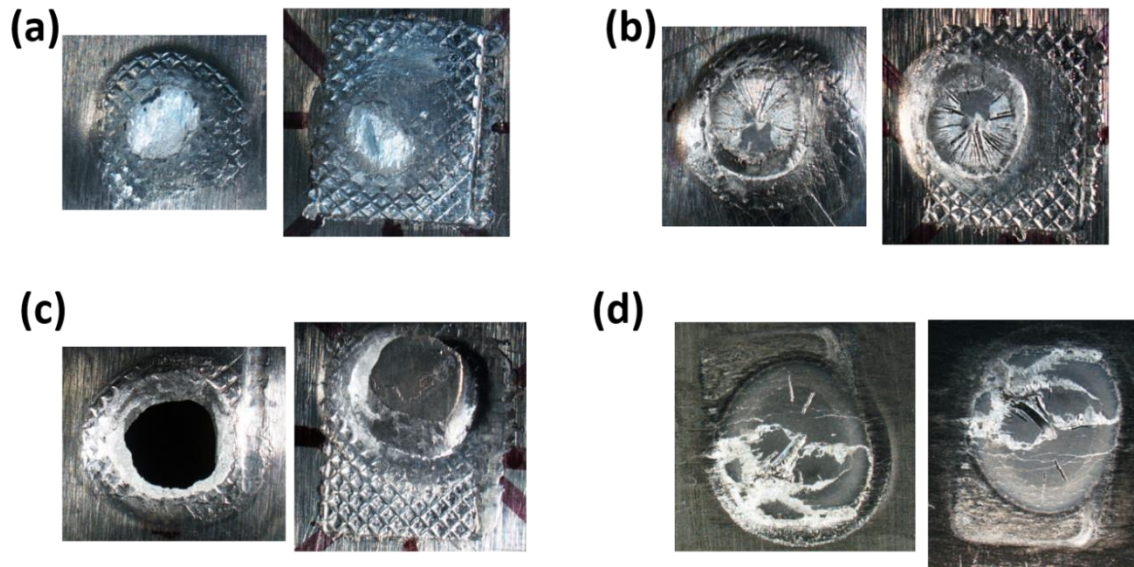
Representative fracture surface for four types of fracture modes at aluminum side (left) and steel side (right): (a) Type 1 (shear fracture at Al/insert interface); (b) Type 2 (partial/full nugget pull-out from insert); (c) Type 3 (button pull-out from Al sheet); and (d) Type 4 (interfacial fracture through insert/steel interface)
